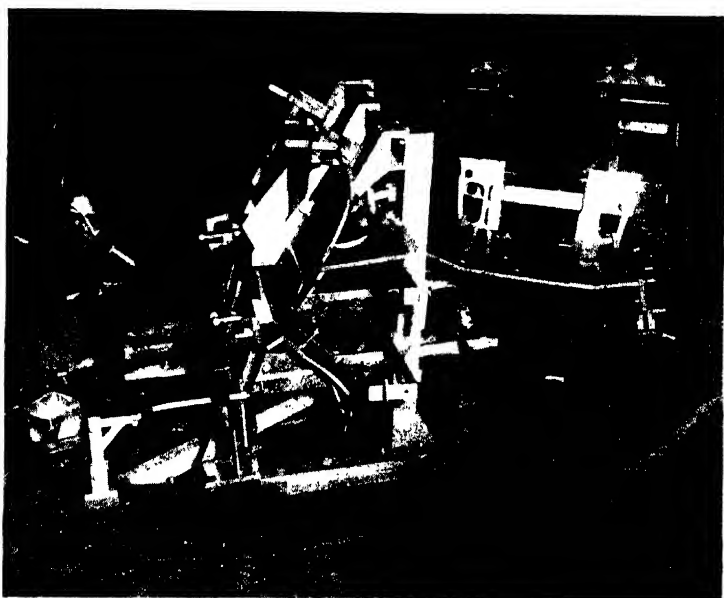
PART OF THE FORWARD-END SUBASSEMBLY TRACK, SHOWING THE DESIGN OF THE FIXTURES ("Welding")
